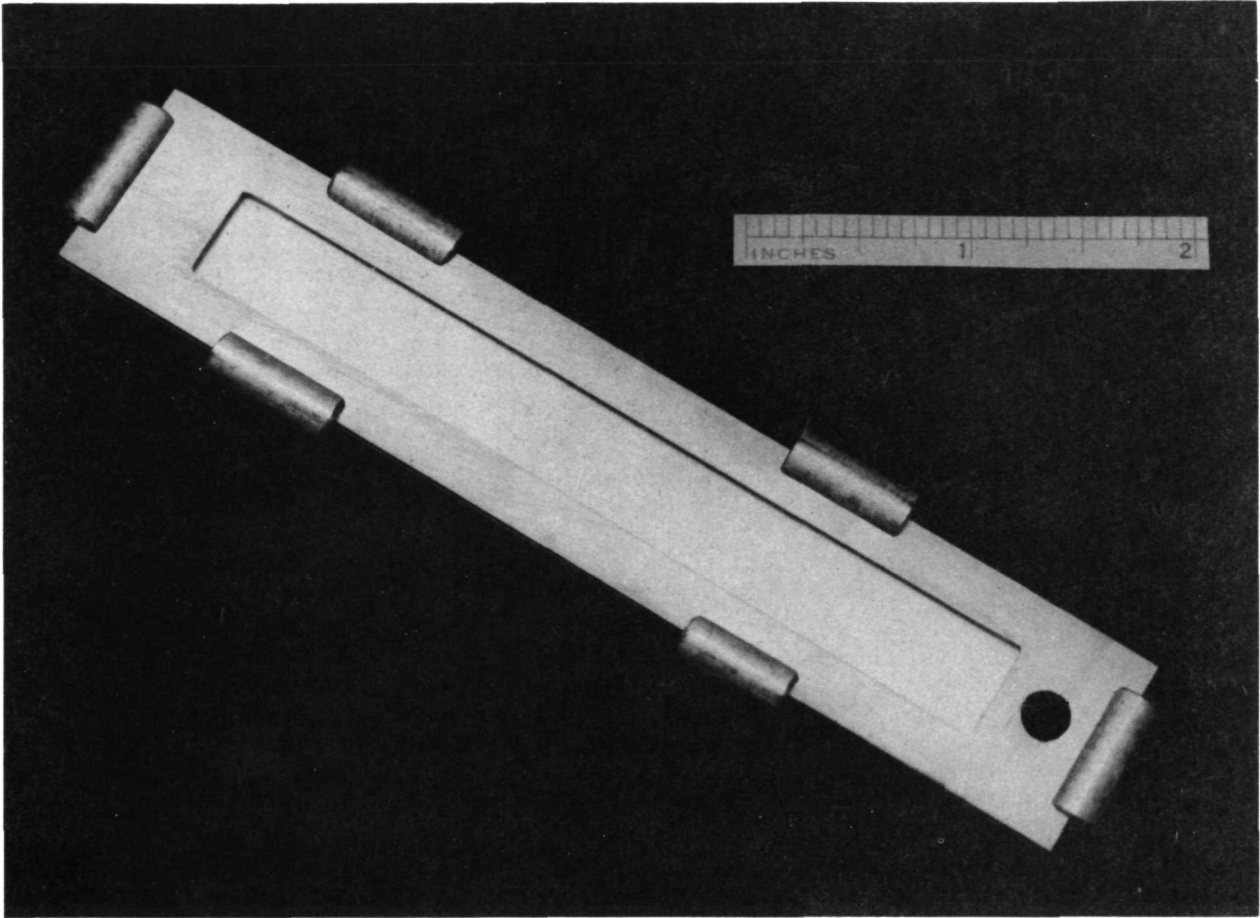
TZM SPECIMEN IN FRAME PRIOR TO COATING
